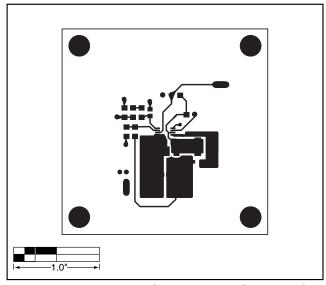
MAX1790 EV Kit PC Board Layout—Component Side
